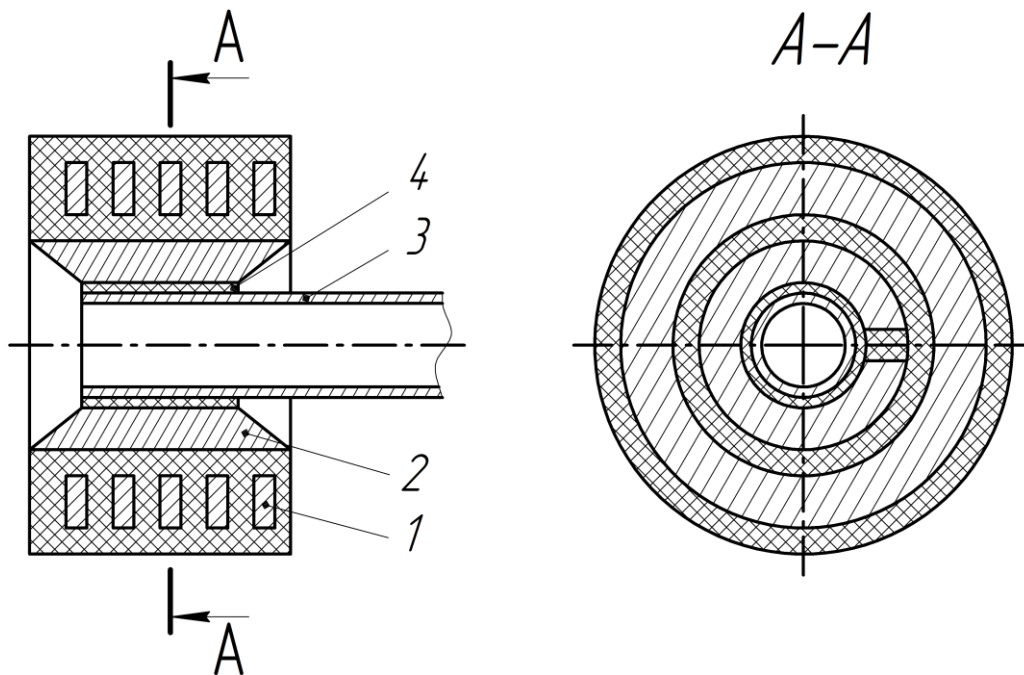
Forming coil (inductor): 1 – coil; 2 – field shaper; 3 – tubular blank; 4 – insulating bushing
